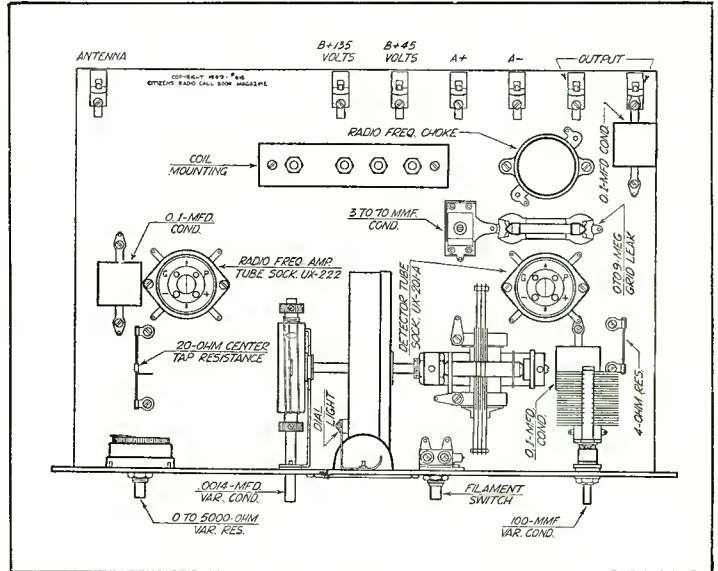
This drawing represents the baseboard layout of the two tube short wave adapter, the panel for which is already punched and properly drilled
